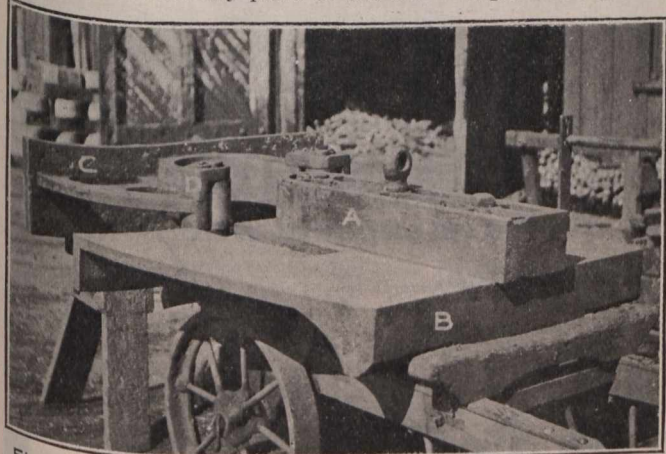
Final Operation of Bending Car-coupler Pocket to a U-shape.
